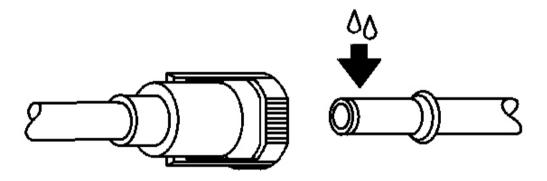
Oiling Male Pipe Ends Courtesy of GENERAL MOTORS CORP.
